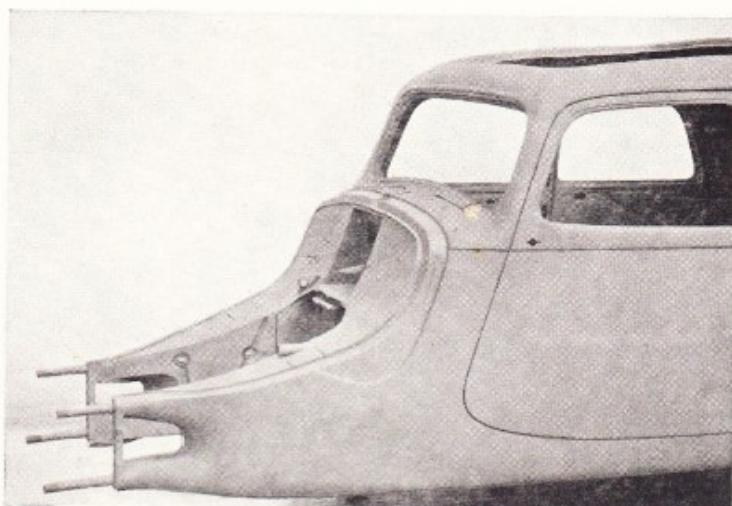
Method of Attaching Power Unit to Monoshell Body.
